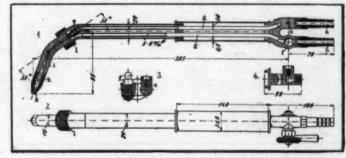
Autogenous welding tool-dimensions in millimeters
